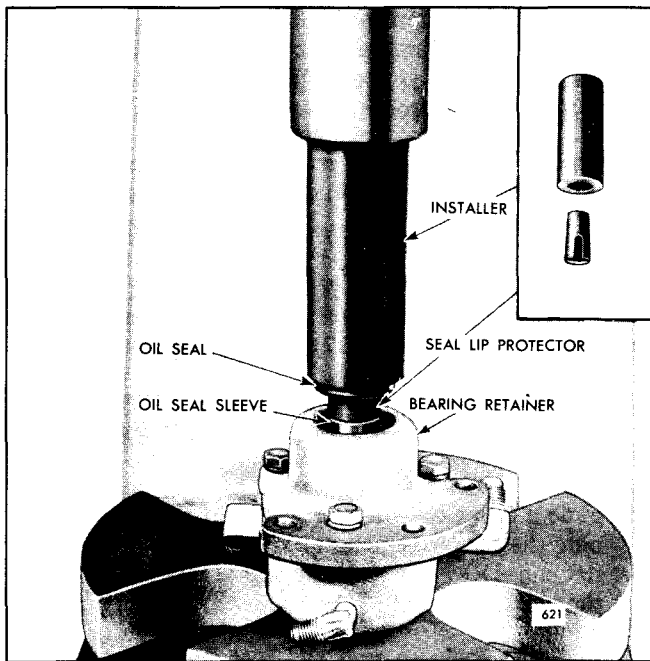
Installing Pump Shaft Oil Seal in Bearing Retainer
